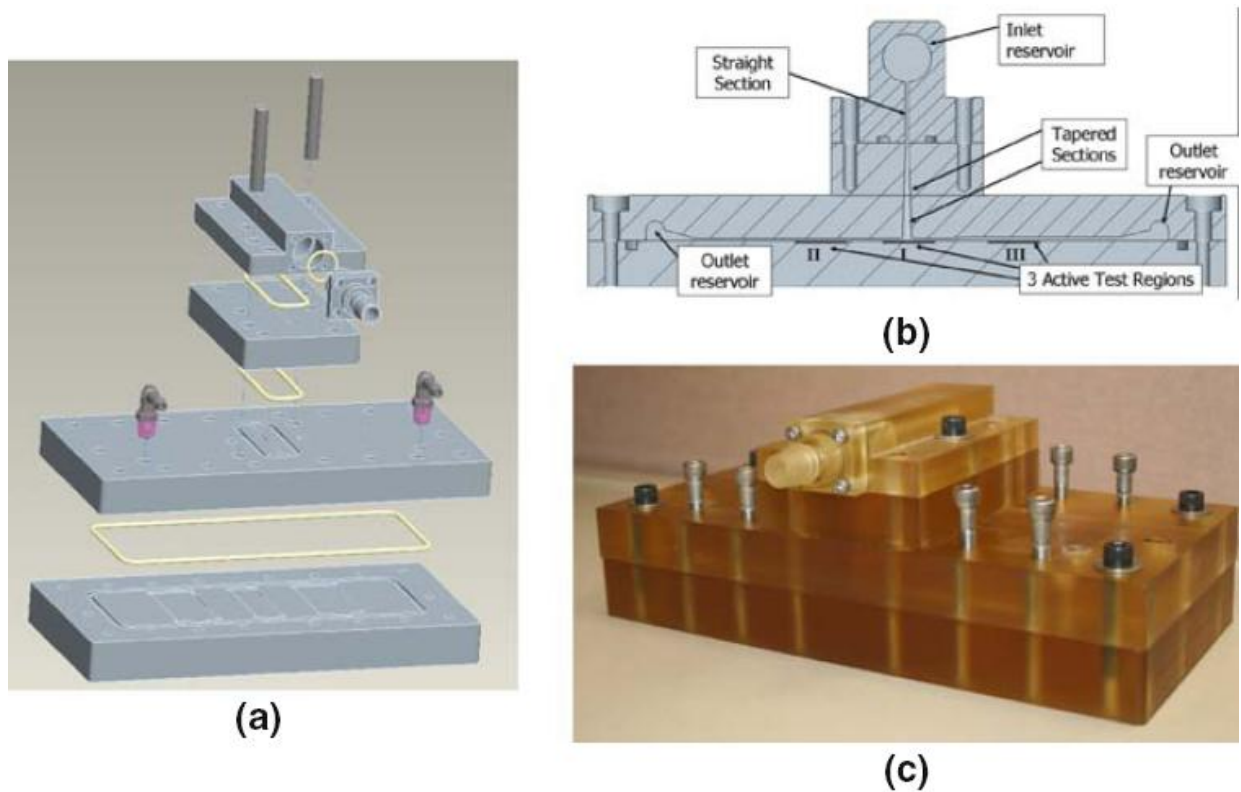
(a) Exploded view of final T-chamber assembly design. (b) Cross section view of assembly design of flow chamber. (c) Photograph of manufactured T-chamber
